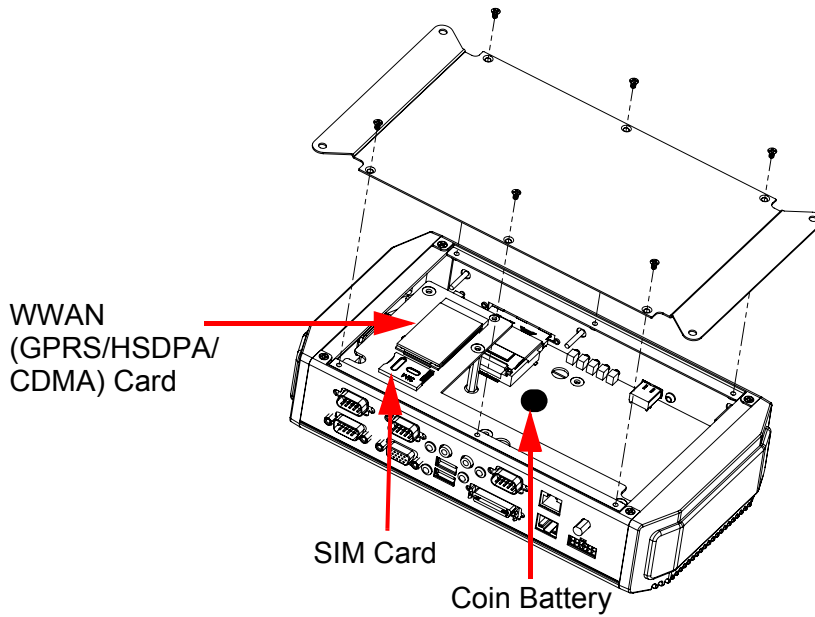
Mini PCI type WWAN module, SIM card and coin battery from bottom view
